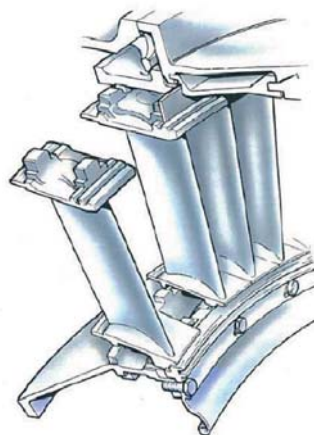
Nozzle device with double-support vane fastening [10]
